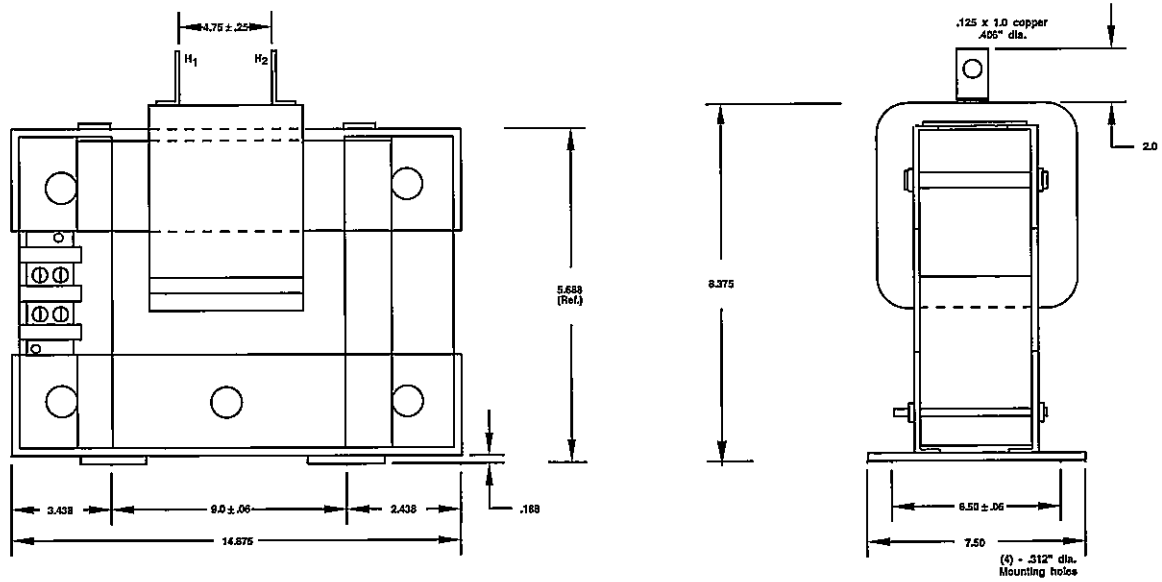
OUTLINE DRAWING BE 25926-001.
